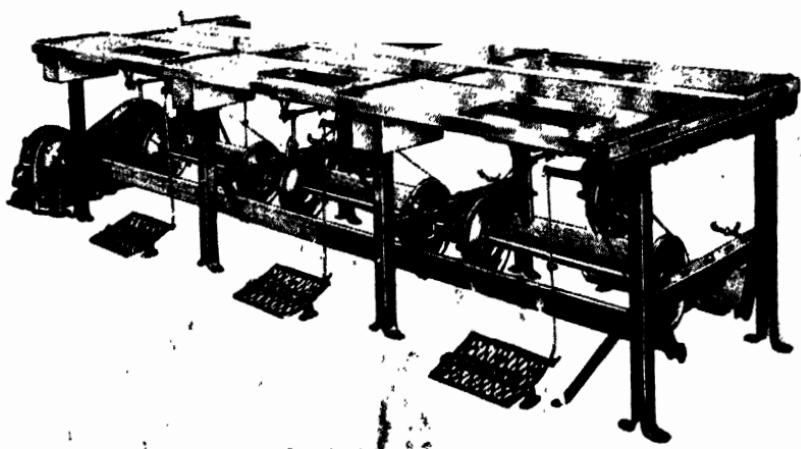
Shaft-driven sewing machines with skirtboard guards. (*Courtesy of the Singer Sewing Machine Company.*)
